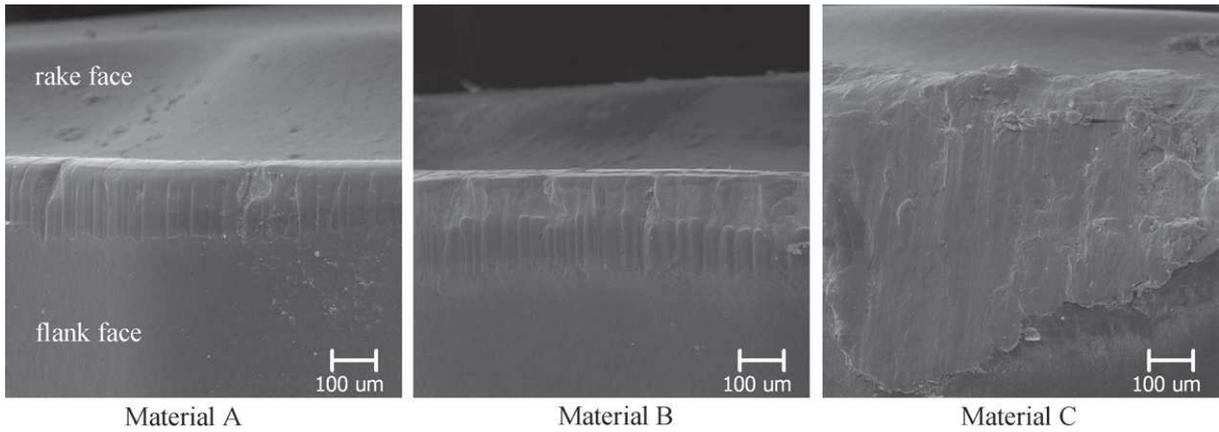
Tool flank wear at cutting speed of 600 m/min.
